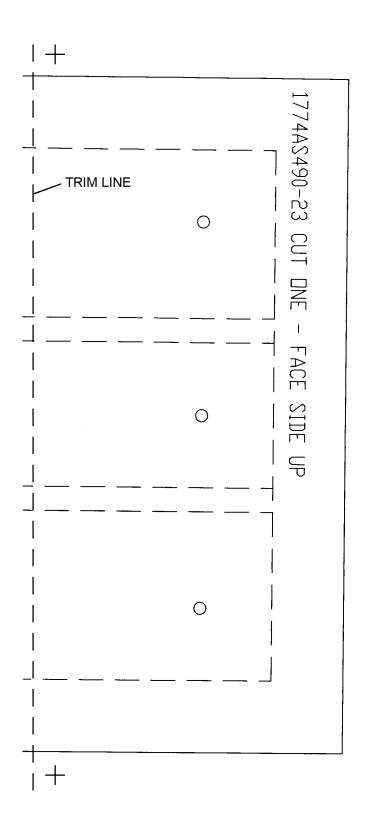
Pistol Pocket Vest Snap Fastener Panel Front Pattern (Sheet 2 of 2)
